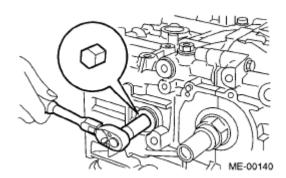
Removing Service Hole Plug Courtesy of SUBARU OF AMERICA, INC.
